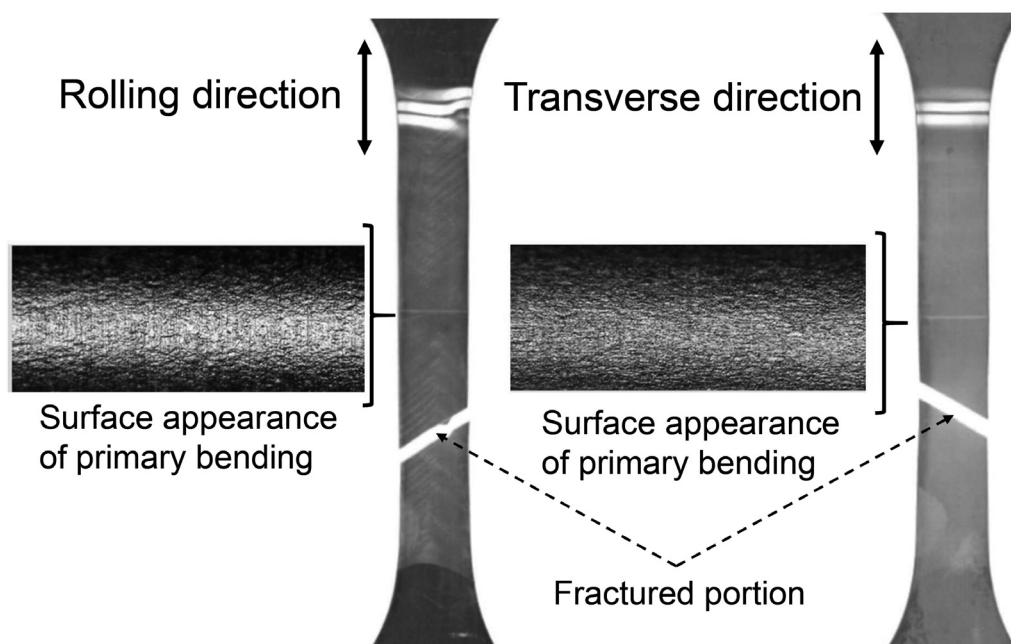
Appearances of both outer surface of primary bending and whole view of test pieces after fracture in both rolling and transverse directions observed in the sample with partitioning treatment at 400°C for 360 min.
